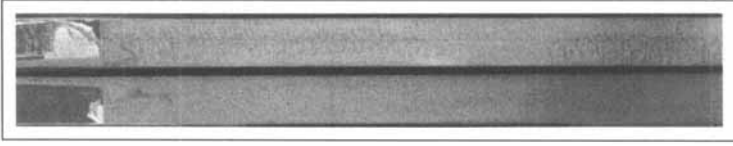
Photograph of the fracture surfaces of the aluminium-alloy (GBD pretreated) joint bonded using the XD4600 adhesive after "wet" fatigue testing. (The fatigue crack has propagated from left to right.) (See Color Plate IV).
